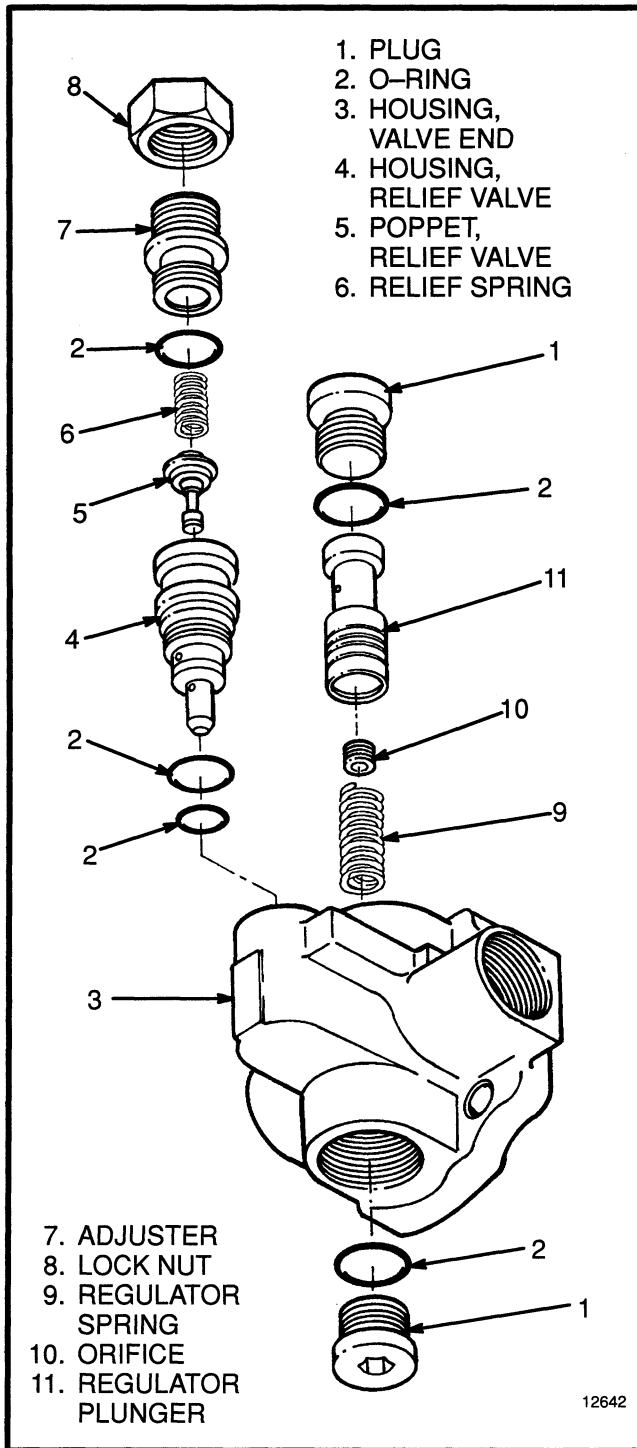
FLOW CONTROL VALVE AND RELIEF VALVE PARTS
